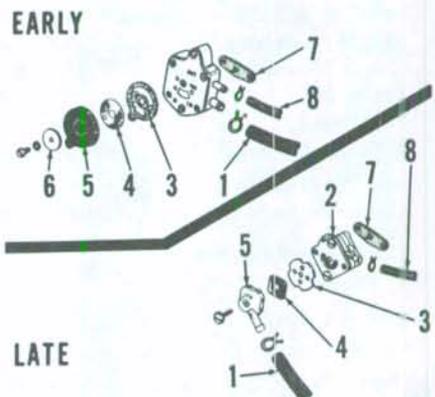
Fuel pump, fuel filter and associated parts. Early type pump is shown at top.
